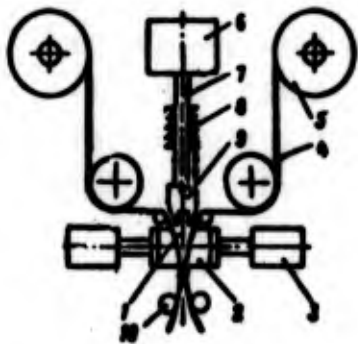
Diagram of the machine for vibration polishing of the foil of blades: 1 - blade; 2 - shoe; 3 - hydrocylinder; 4 - polishing strip; 5 - coil of the strip; 6 - mechanism of the vibrator; 7 - rod; 7 - guide of the rod; 9 - grip; 10 - stretching rollers.
